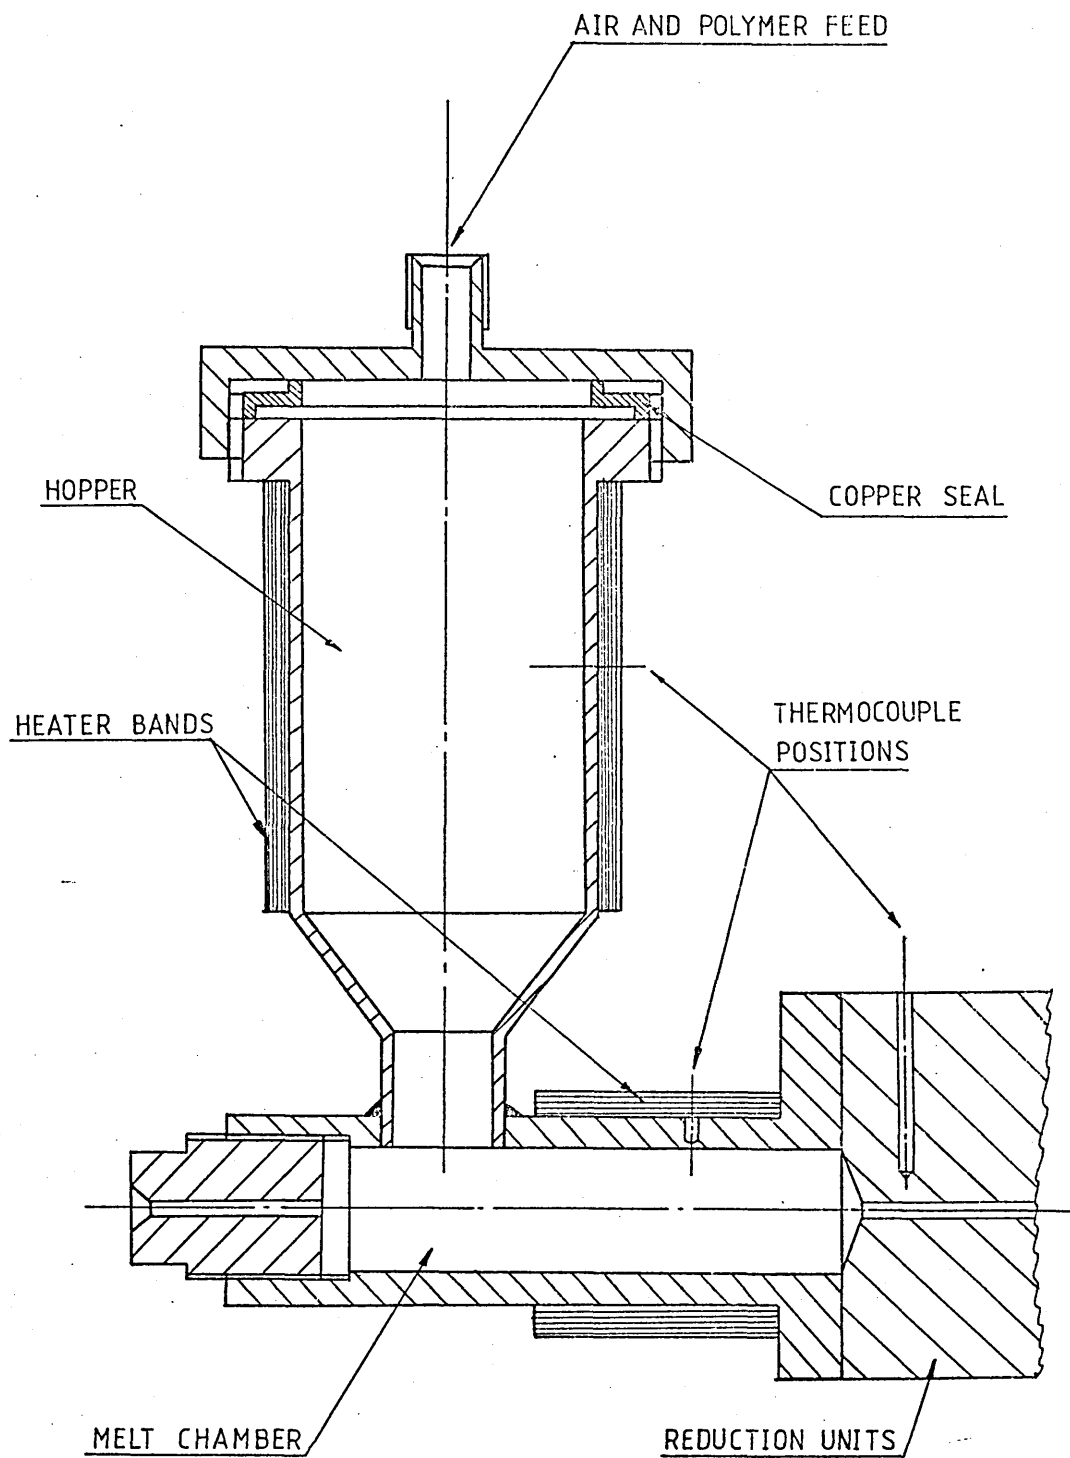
AIR ASSISTED POLYMER FEED ASSEMBLY
